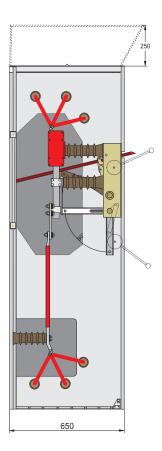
Side view of Bus sectionalizer panel FÜ24-606519-72 with switch disconnector H27 EK
